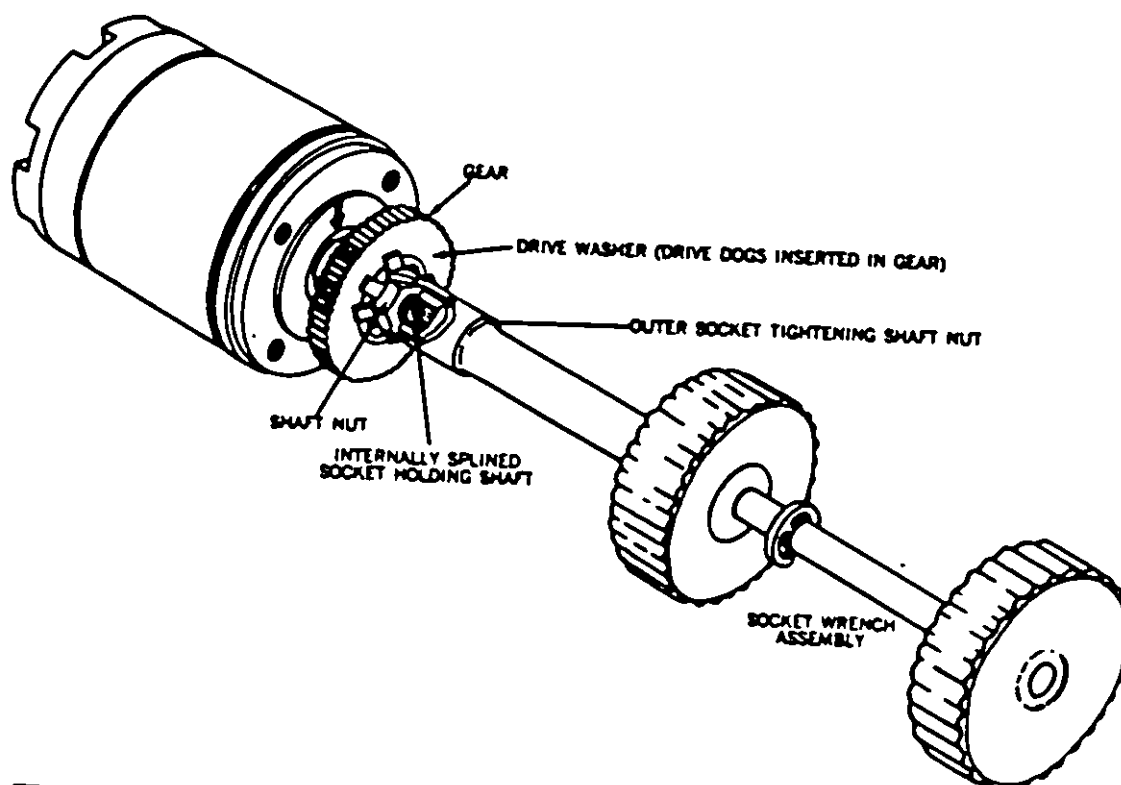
Mounting a gear on a standard synchro (assembled cutaway view).
